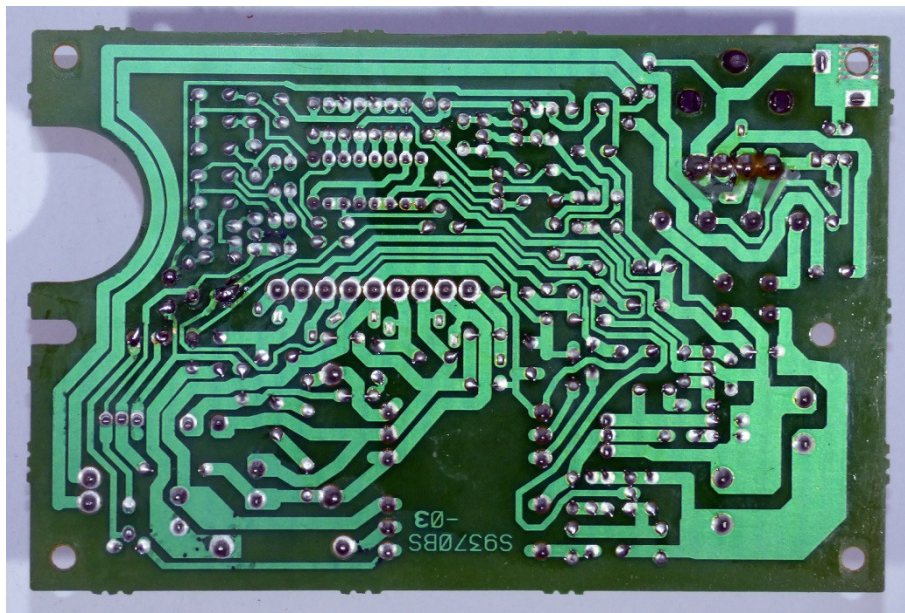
Lower side of DeskJet 500 power supply board, connector pins reflowed.
